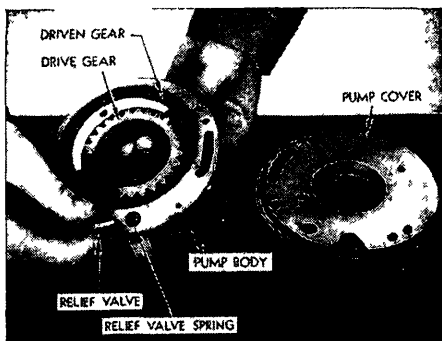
Lubricate pump gears with Hydra-Matic fluid. Install gears in gear pockets, being sure Prussian blue mark previously made on gear is facing up
